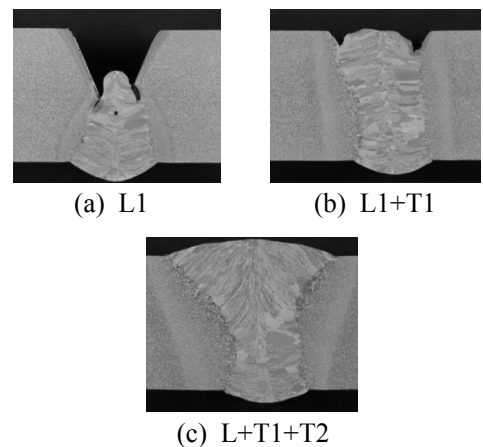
Photo of weld metal on transverse cross section obtained by experiment.
